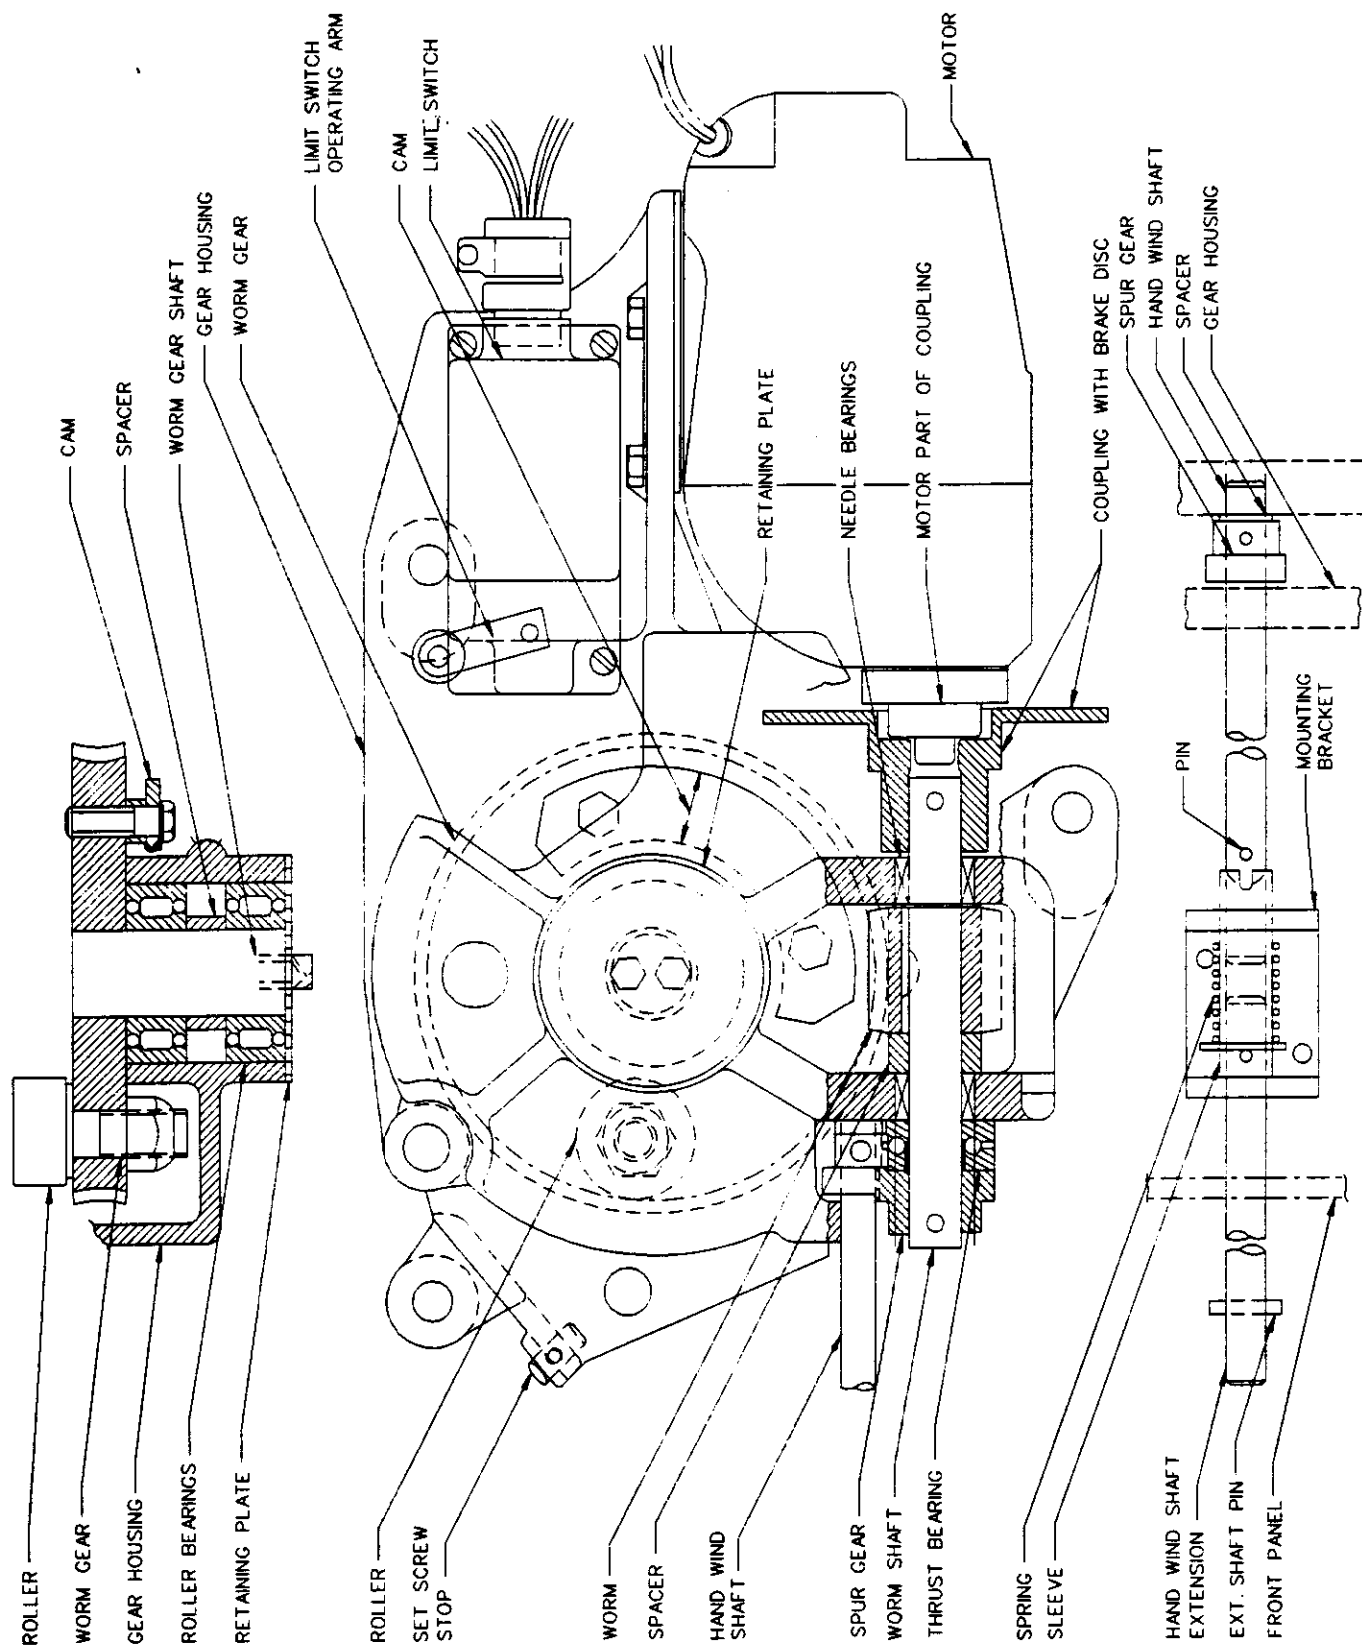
General Disposition of Gear Housing and Gear Drive of Storage Engine and Gear Housing
